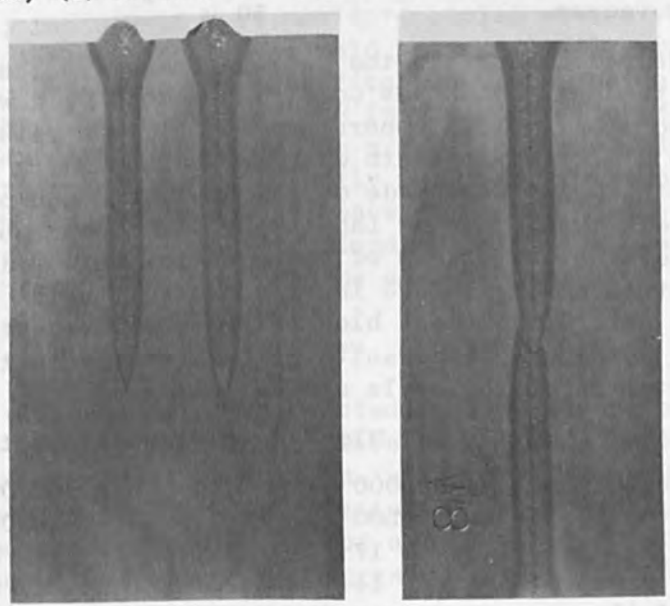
Partial-vacuum EB welds in 12% Cr steel 4 in. thick.
